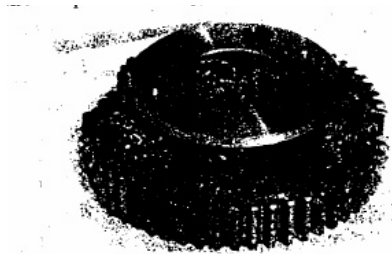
Planetary wheel support of reversing gear assembly with planetary wheel
